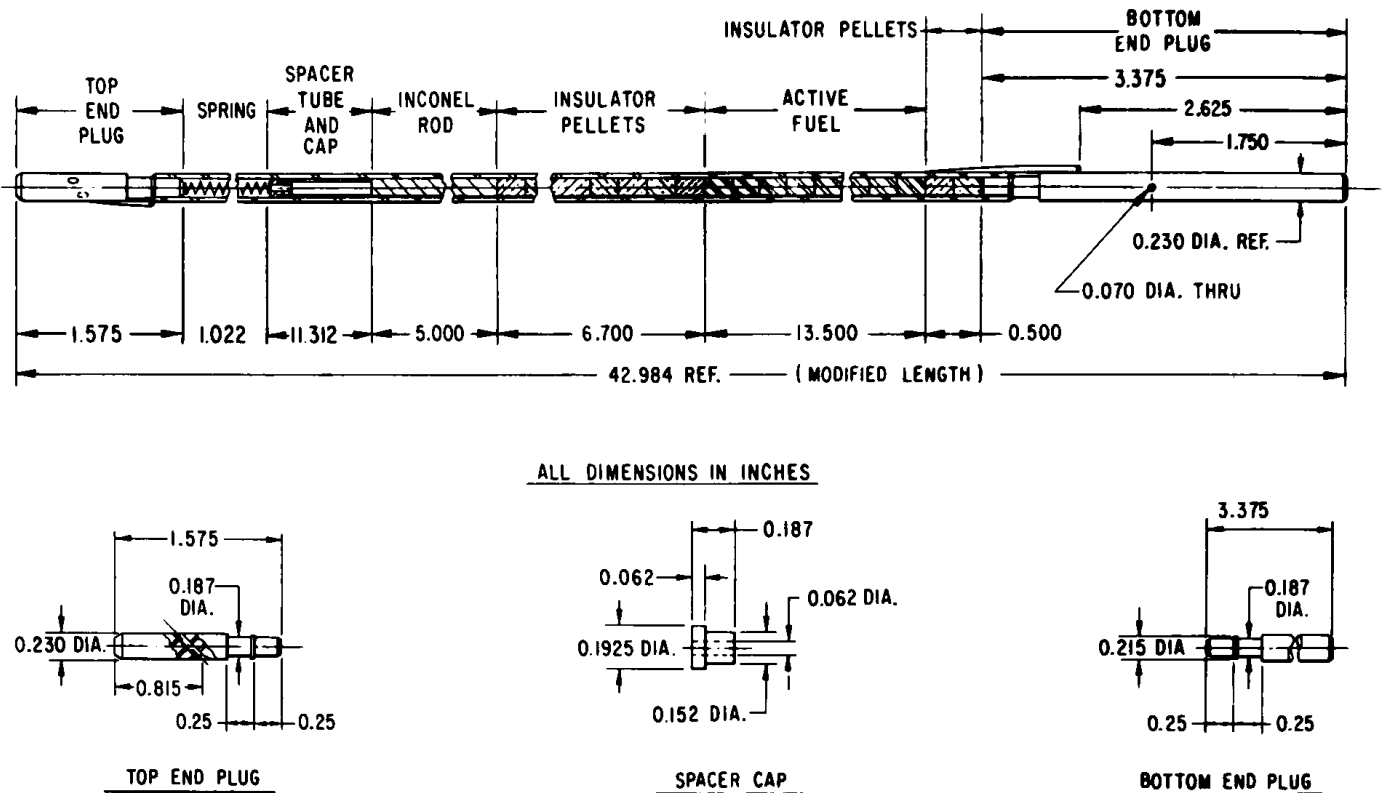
Modified HEDL N-F Fuel Pin. Conversion factor: 1 in. = 2.54 cm. ANL Neg. No. 900-4383.
